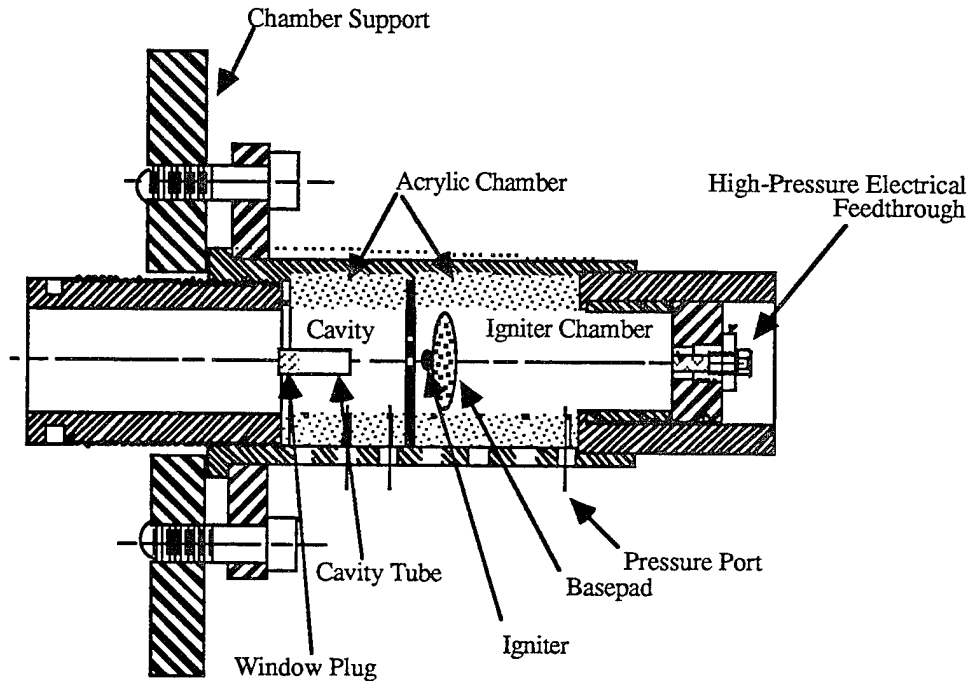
Cross-sectional view of flarespread simulator with cavity and igniter chambers.
